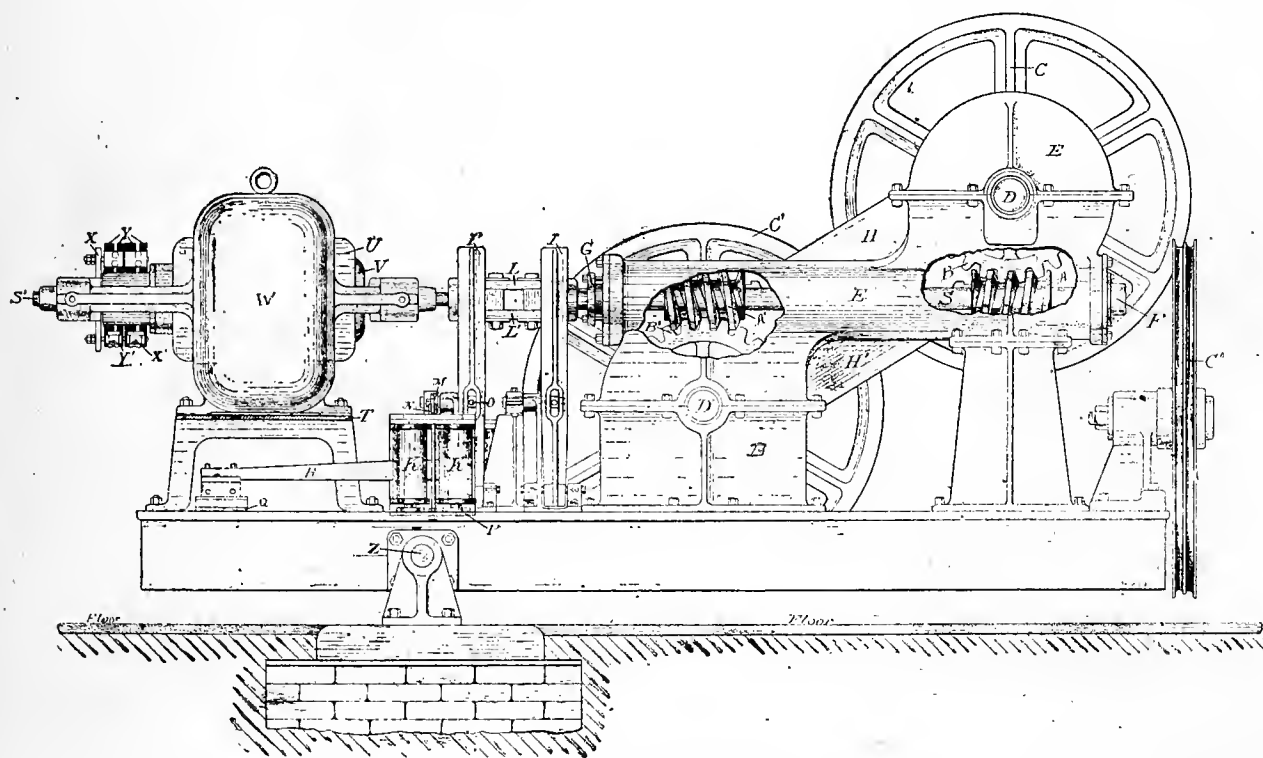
DEPARTURE IN ELECTRIC ELEVATOR CONSTRUCTION.
